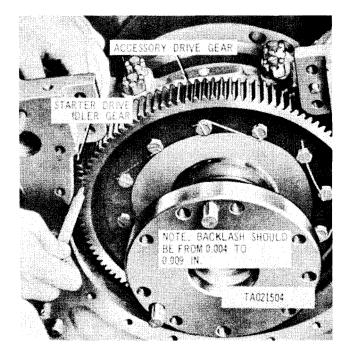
Checking accessory drive gear and starter idler gear backlash.
